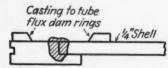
Flux dam arrangement used in joining seam of cast head and aluminum tube.
